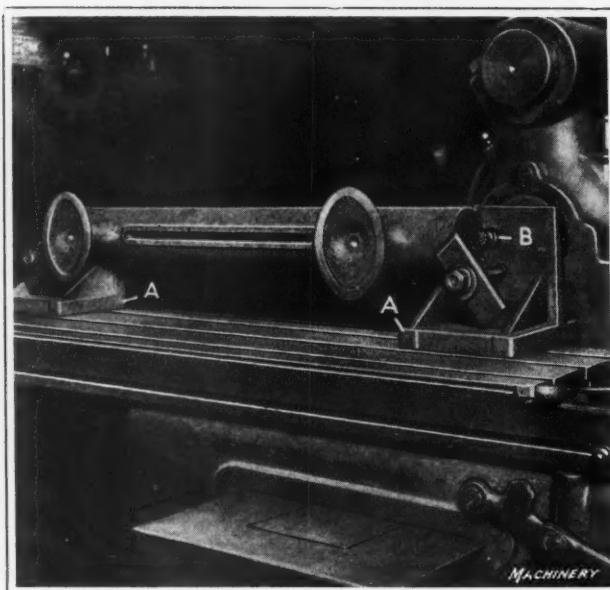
Work located from the Previously Finished Top Surface and clamped to Two Angle-plates for T-slitting Operation
